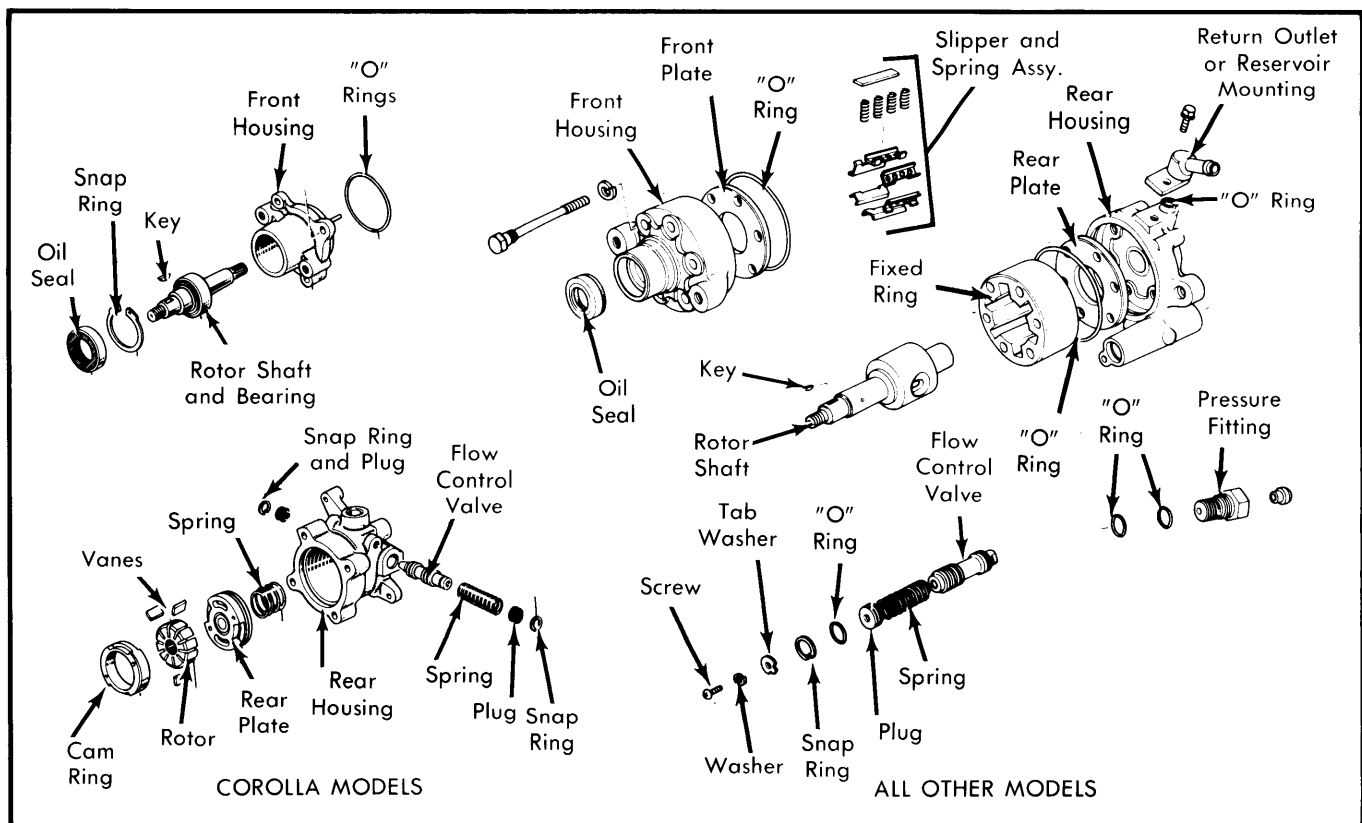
Exploded View of Toyota Power Steering Pump Assembly
